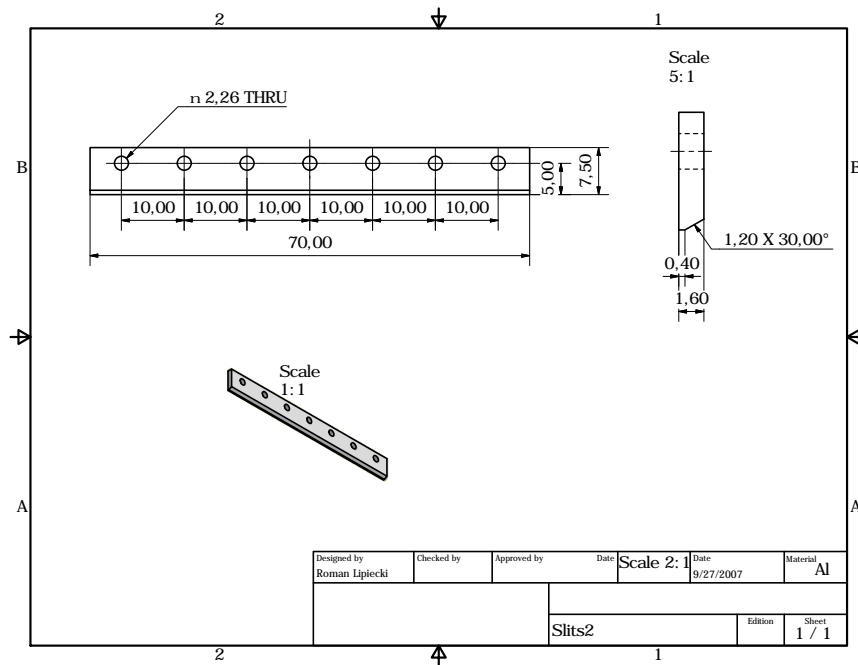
Drawing of homemade nozzle caps (8 cm) - The slit is 70 mm × 0.06 mm.
